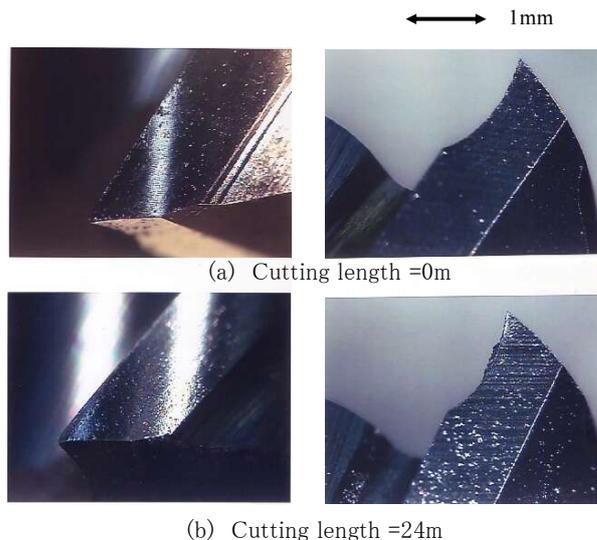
Cutting edge (right: bottom edge left: side edge)
